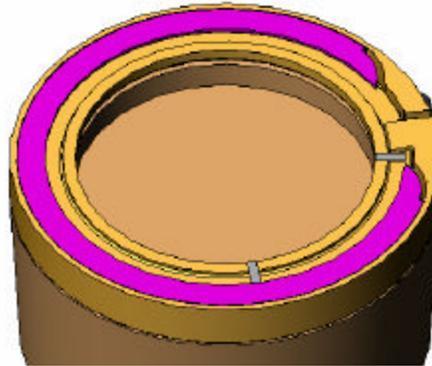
The assembly in 7 has been sectioned the other way to show how the two small pins prevent excessive rotation. One pin is up against the extended flange that acts as a limit stop. The other pin can rotate 270° before it hits the other side of the flange.
